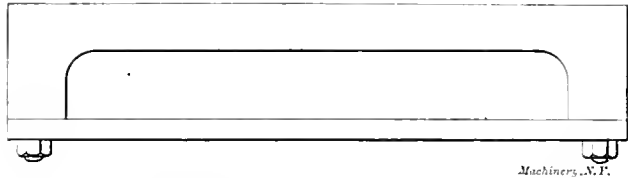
Piece shown in Fig. 1, made in Two Parts.
